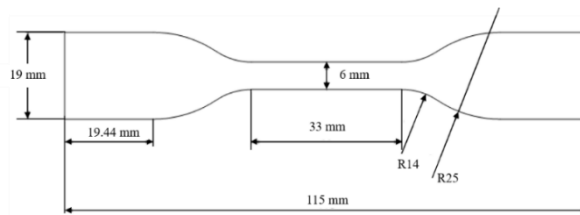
Tensile specimen demonstrating length, reduced gauge section and enlarged width according to ASTM D412 type C [79]
